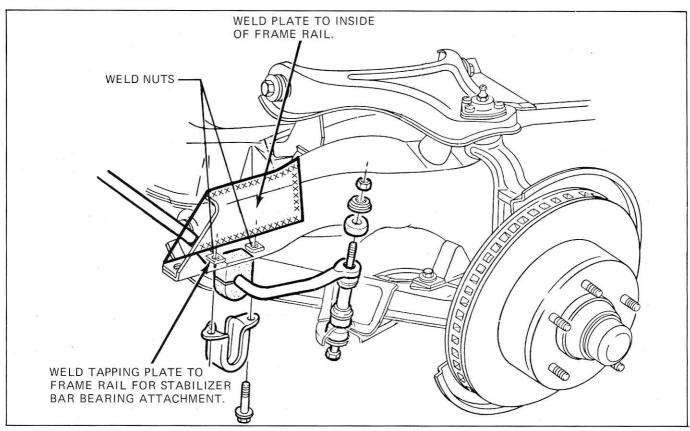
Weld tapping plate to inside of frame rail for stabilizer bar bearing attachments.
